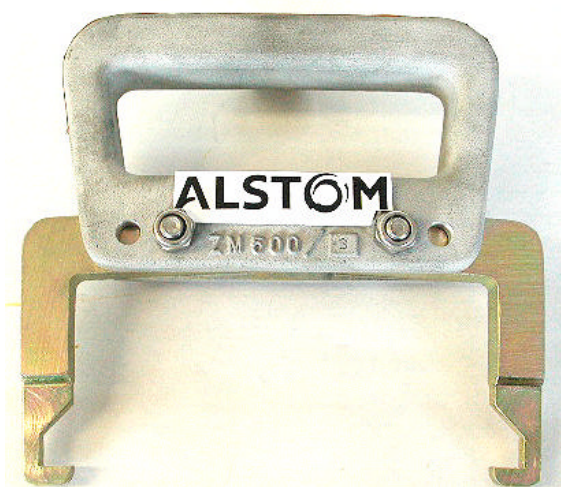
Extractor tool to remove/re-assemble the fitting from/to the seating pot.
